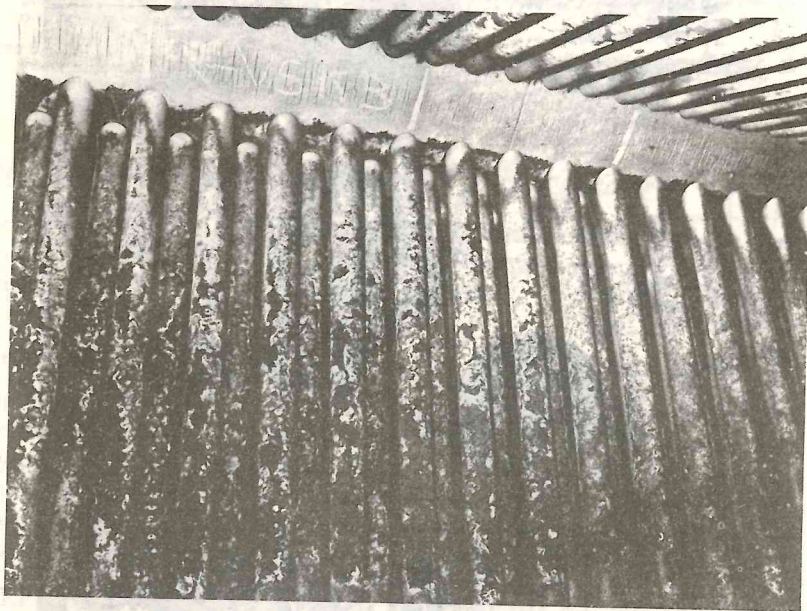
Thermal fatigue cracking of boiler drum
